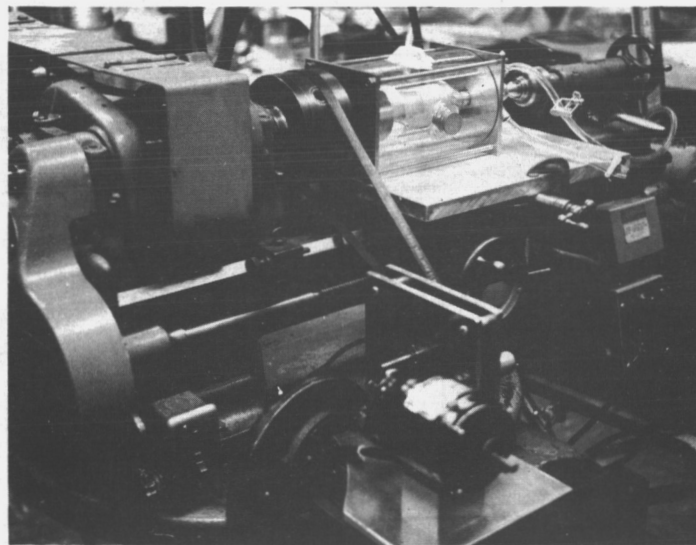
Welding Fixture Mounted on a Lathe for Centering and Driving.
